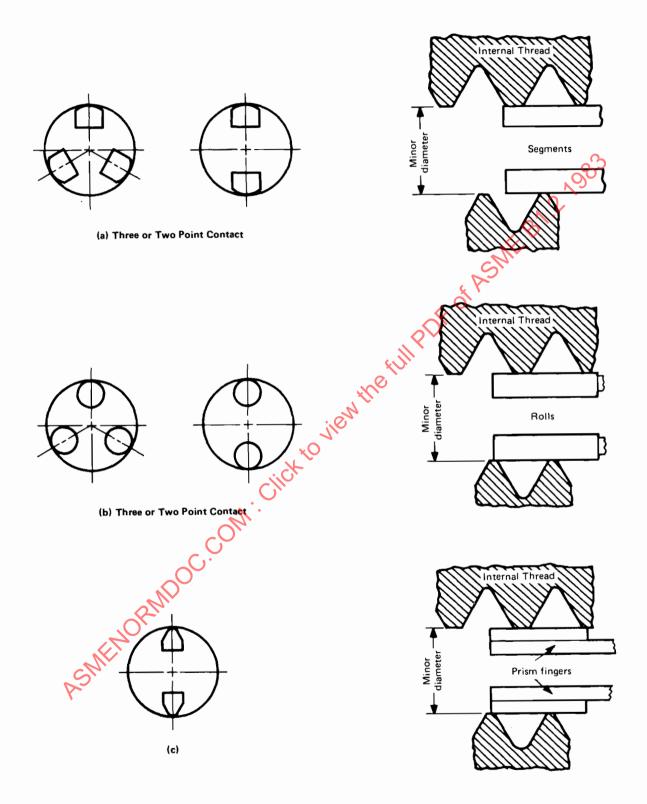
INDICATING PLAIN DIAMETER GAGES — MAX.-MIN. MINOR DIAMETER LIMIT AND SIZE
